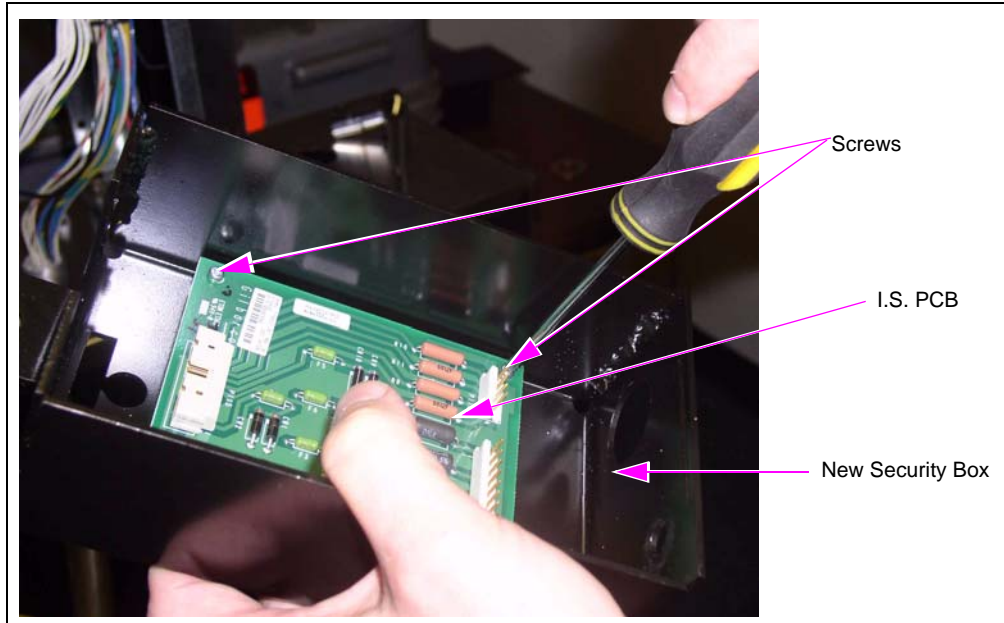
Removing the I.S. PCB and Disconnecting the Cable
